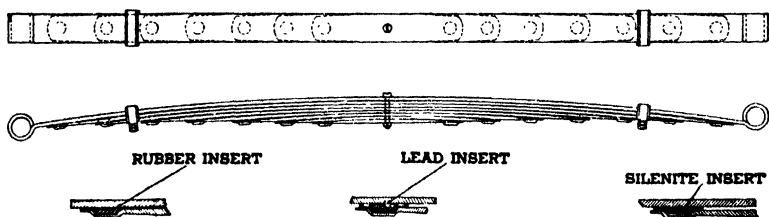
PACKARD REAR SPRING WITH INSERTS.
